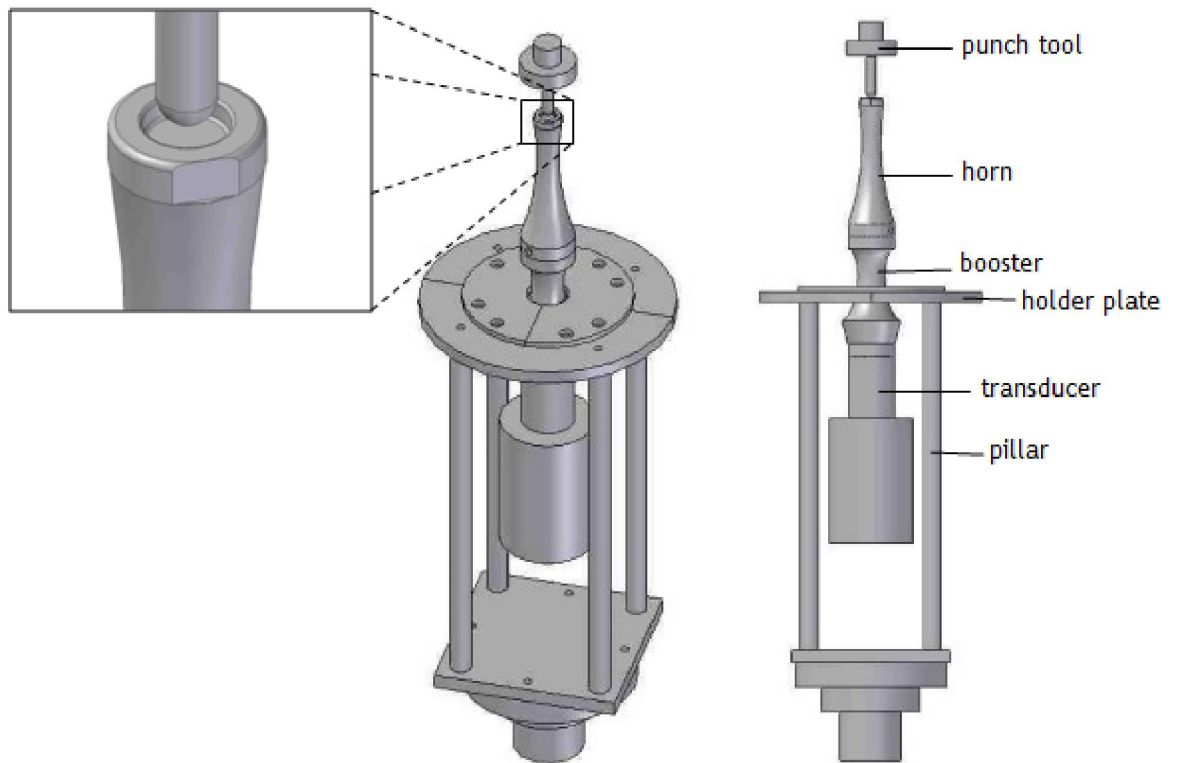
A schematic illustration of the apparatus for static and ultrasonic forming tests with insert zoom at punch tool and ultrasonic die horn.
